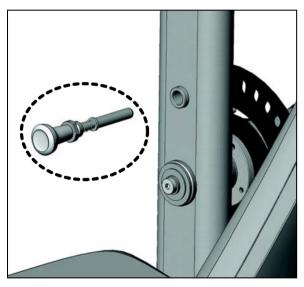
Inspect pop pins (pop pin shown in exploded view for clarity)
